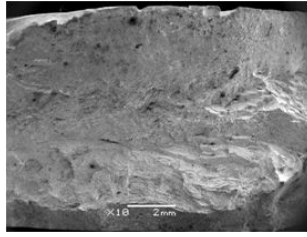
Fractured FCAW welded specimen with through thickness notch
